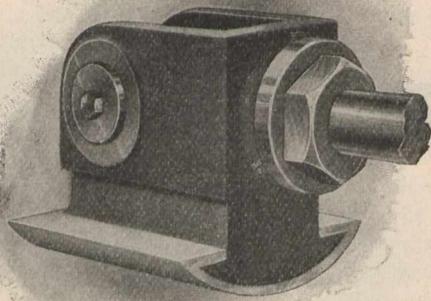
Cross-head of Medium-speed four-valve Engine. (three-quarter view).
